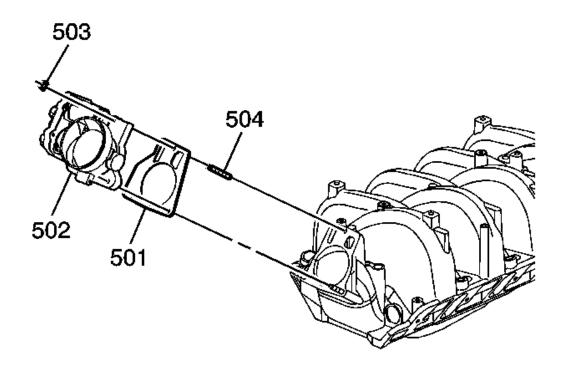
View Of Throttle Body, Nuts, Studs & Gasket Courtesy of GENERAL MOTORS CORP.
